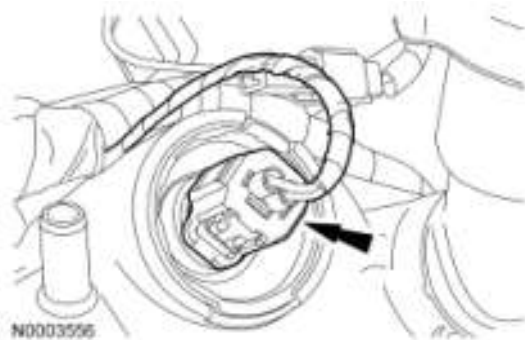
Locating Camshaft Timing (VCT) Solenoid Electrical Connectors
